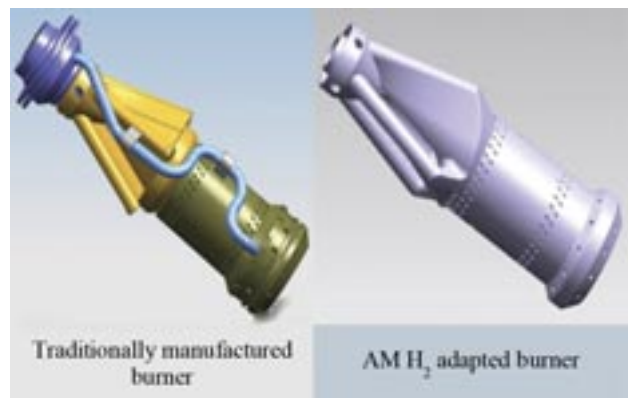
Comparison of a traditionally manufactured burner machined from 13 parts with 18 welds with a single piece Additive Manufactured burner design [4]
